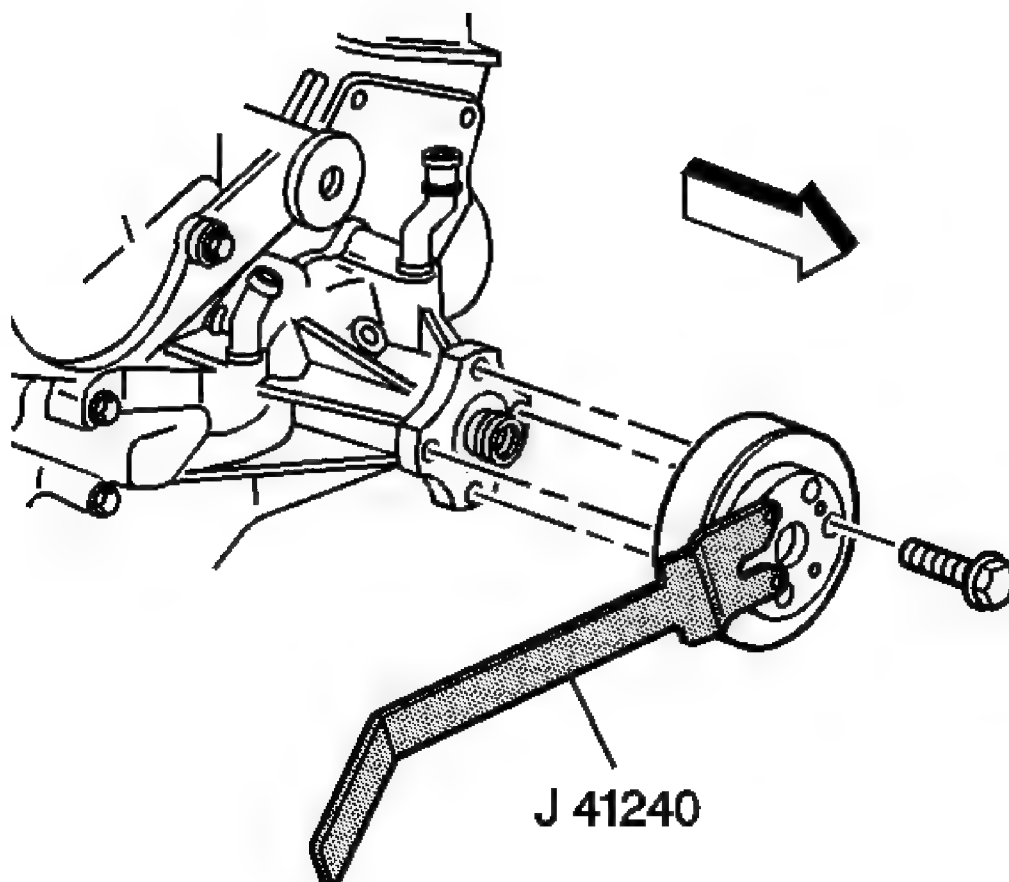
View Of Fan, Water Pump Pulley & Bolts
